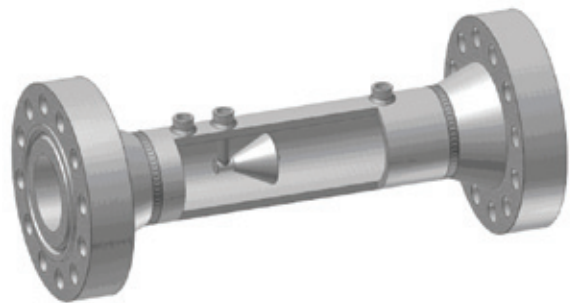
A drawing of a cone meter with a cut away of the wall to expose the cone assembly.
